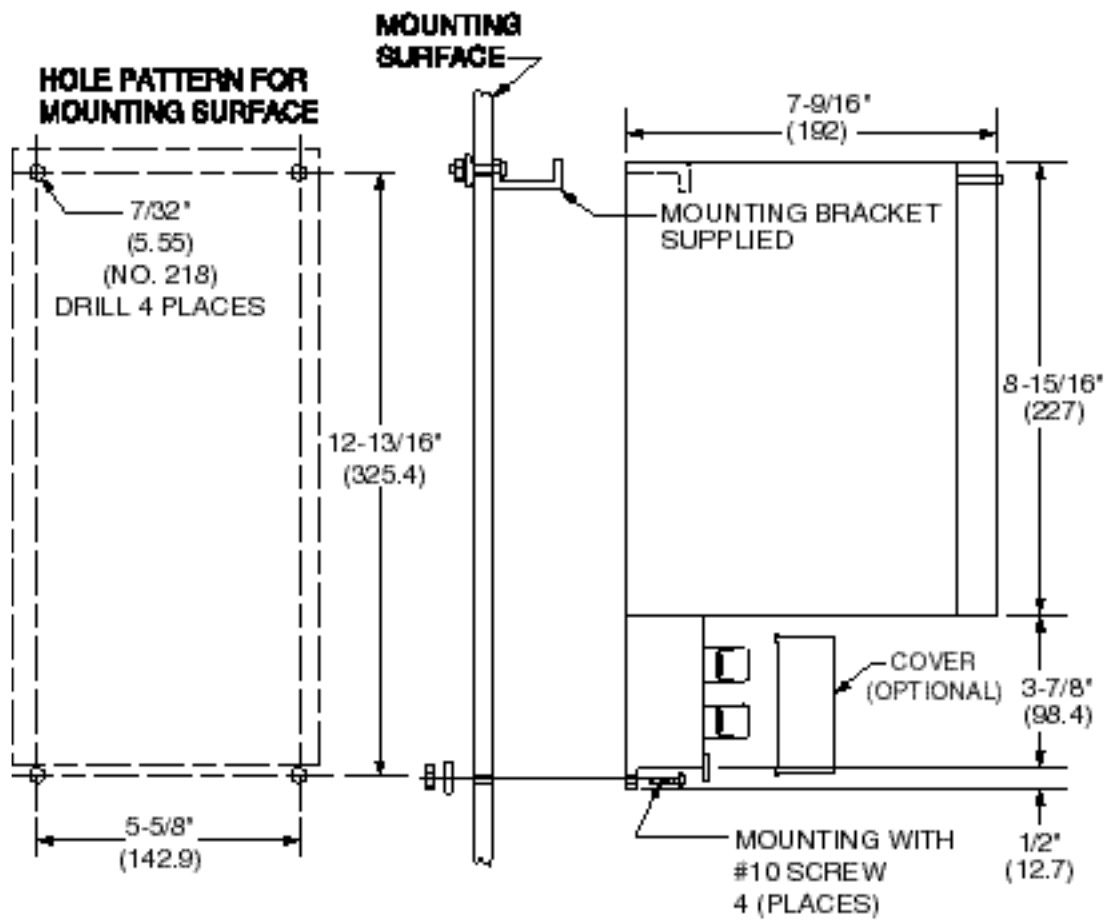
Mounting Dimensions for Front Connected (F Option) JEM1 Meters
